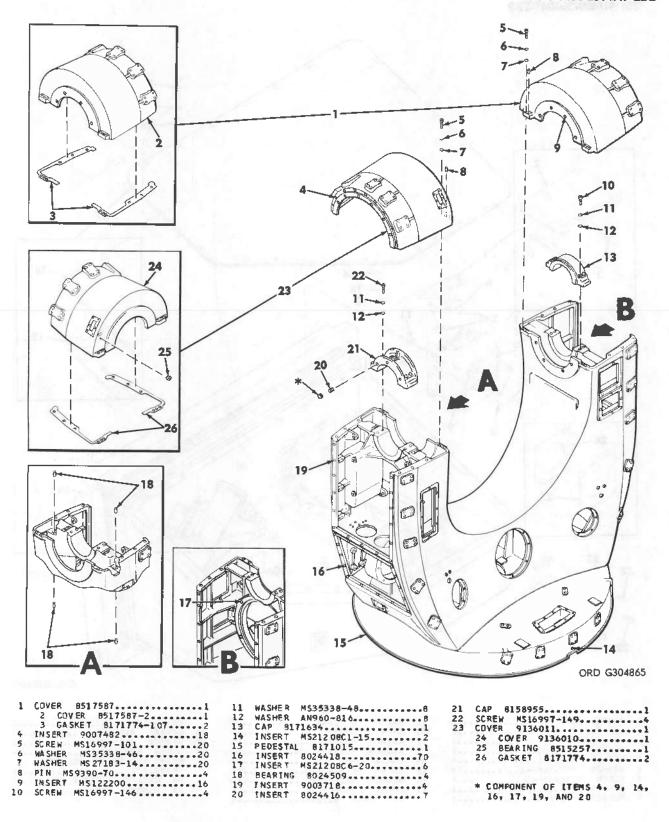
PEDESTAL /8171633/-PARTIAL EXPLODED VIEW
